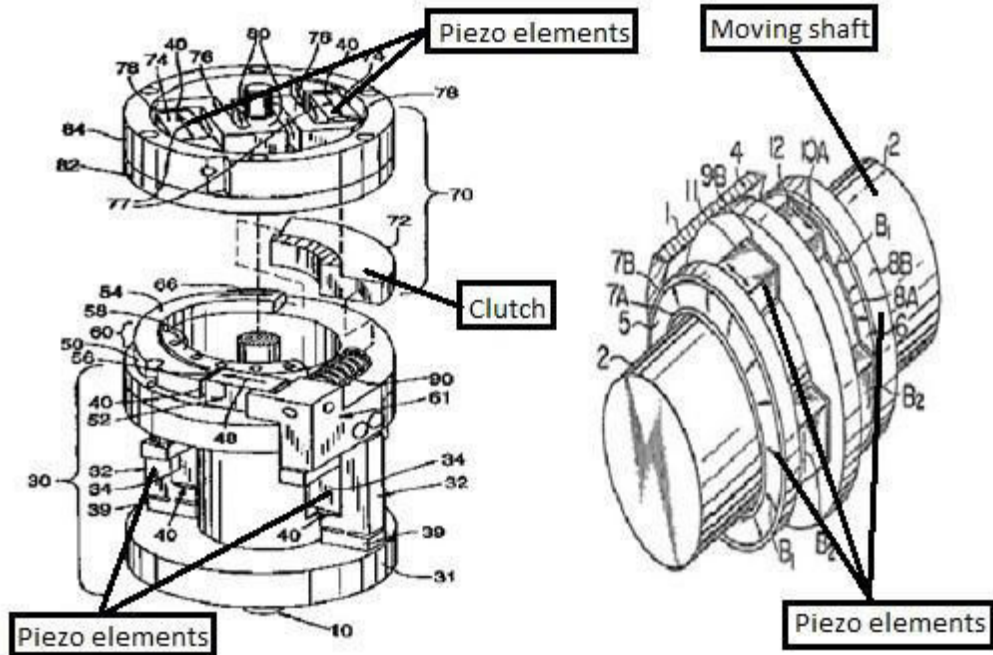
Piezoworm shaft motors (a) Gursan (b) Mori [65, 66]
